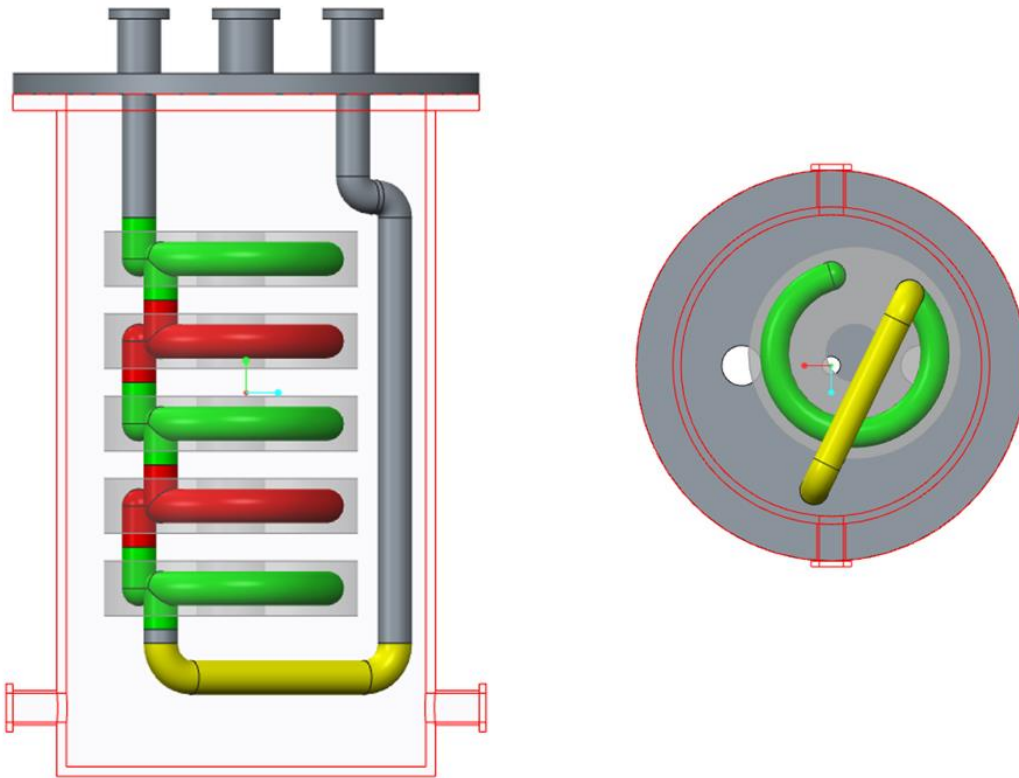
3-D CAD model of Bed Design 2 with vacuum chamber, front and bottom views
